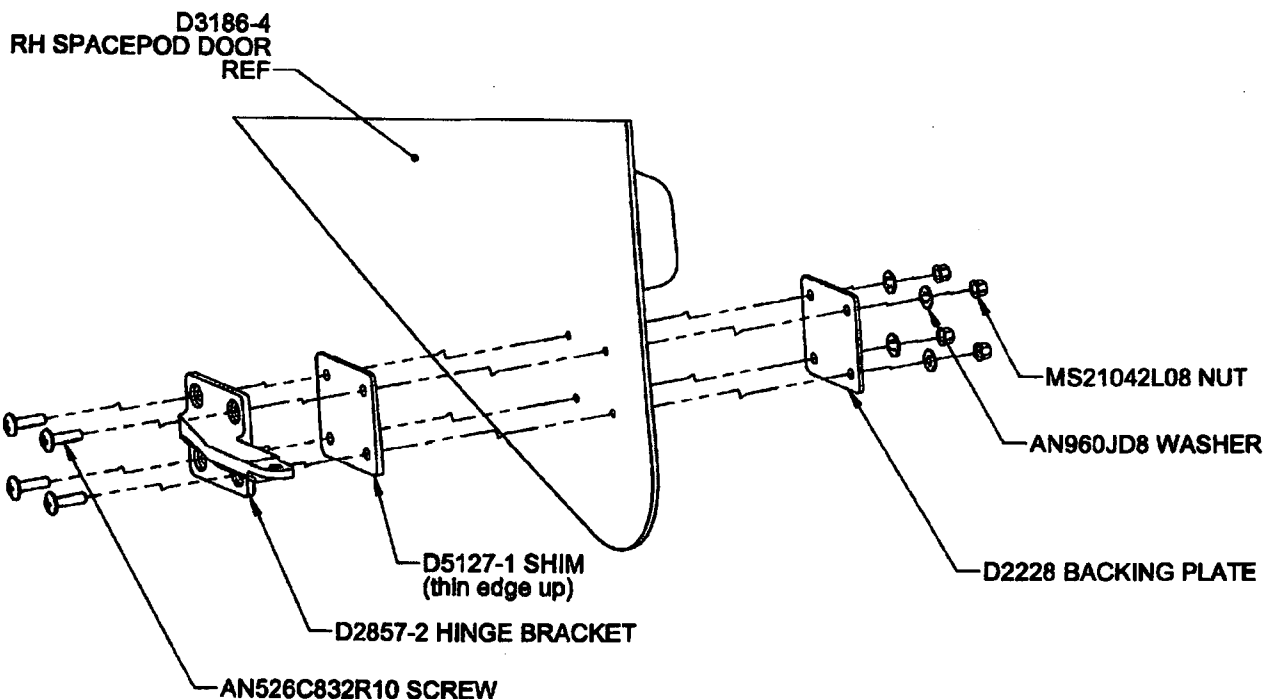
SPACEPOD DOOR HINGE INSTALLATION
